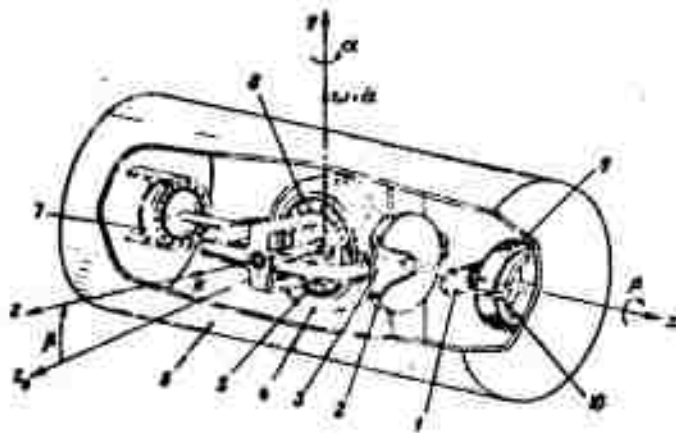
Simplified drawing showing design of integrating gyroscope. 1) Potentiometer wiper; 2) shell of damper (rigidly mounted in gyroscope housing); 3) disk of damper (rigidly attached to gyroscope frame); 4) gyroscope rotor; 5) gyroscope frame; 6) gyroscope housing; 7) torquer; 8) gyromotor stator; 9) potentiometer; 10) center tap of potentiometer.
